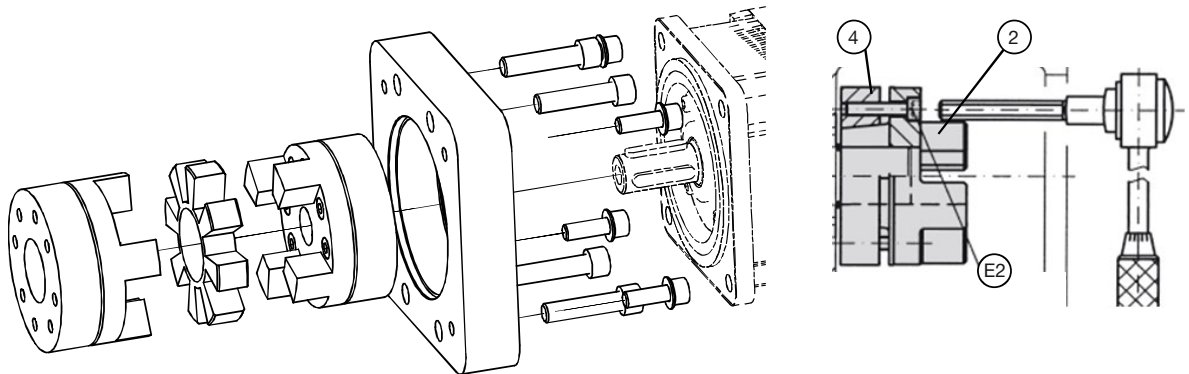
Motor /gear assembly ETH100 ... ETH125 inline
